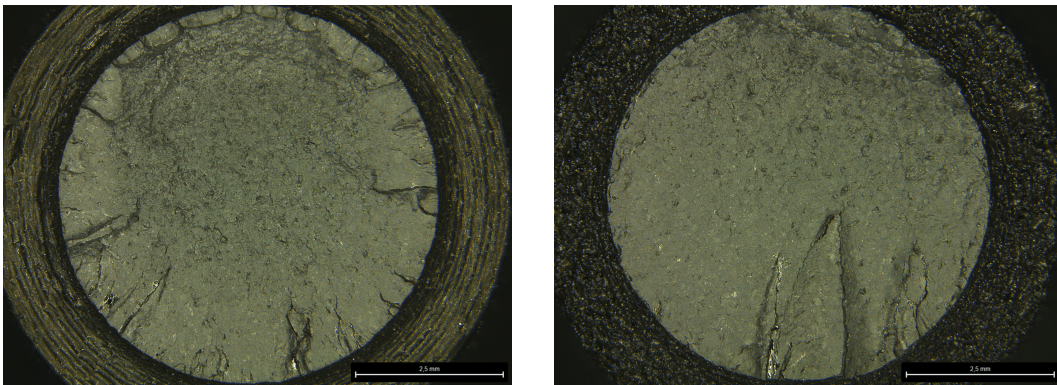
Fracture surface specimen A2.2:2 (left) A2.2:3 (right).
